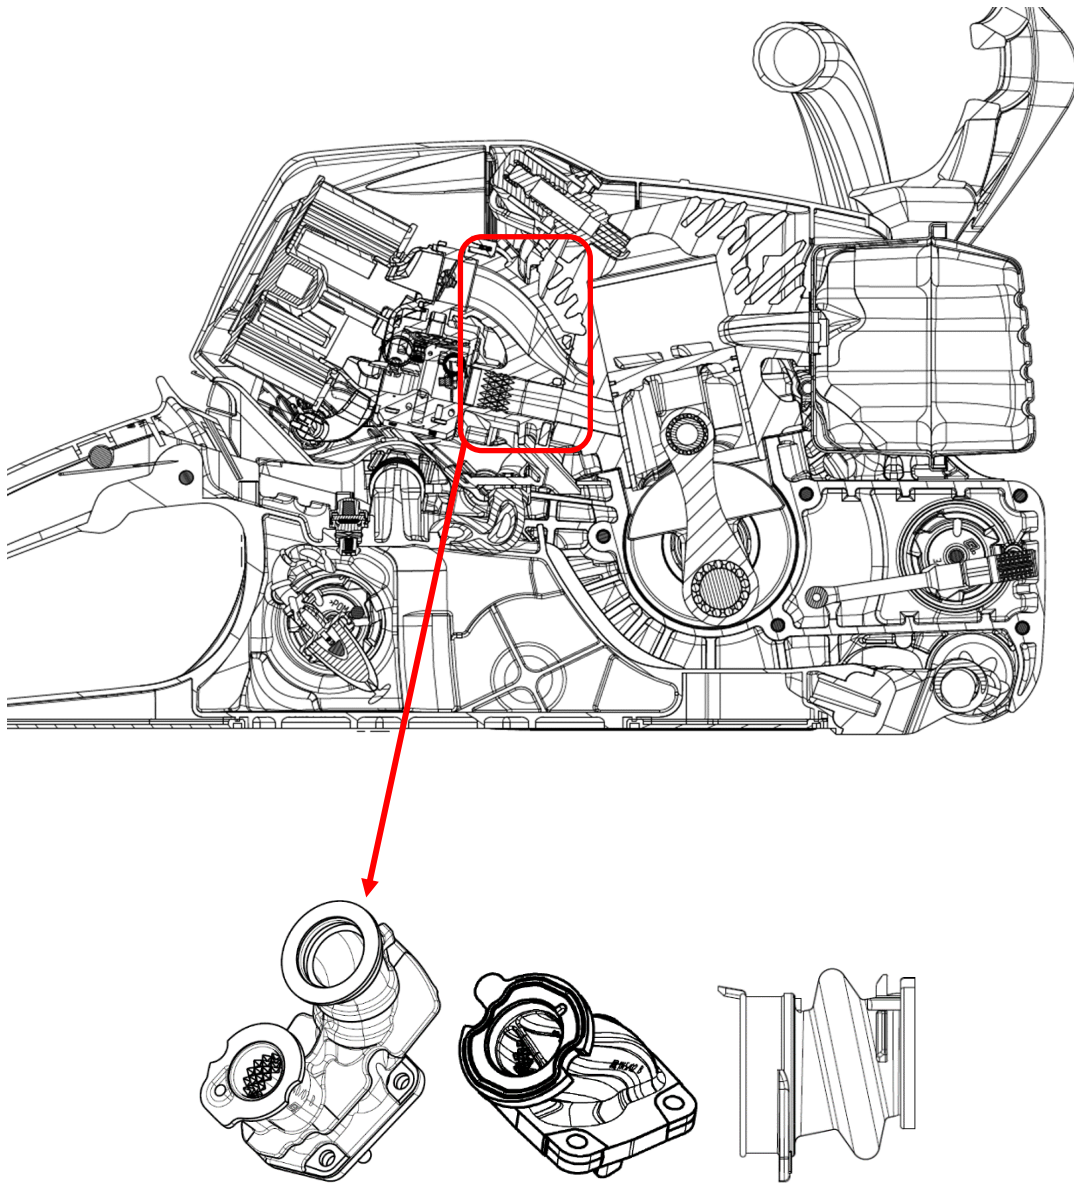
Examples of manifold in a chainsaw and other handheld garden tools.
